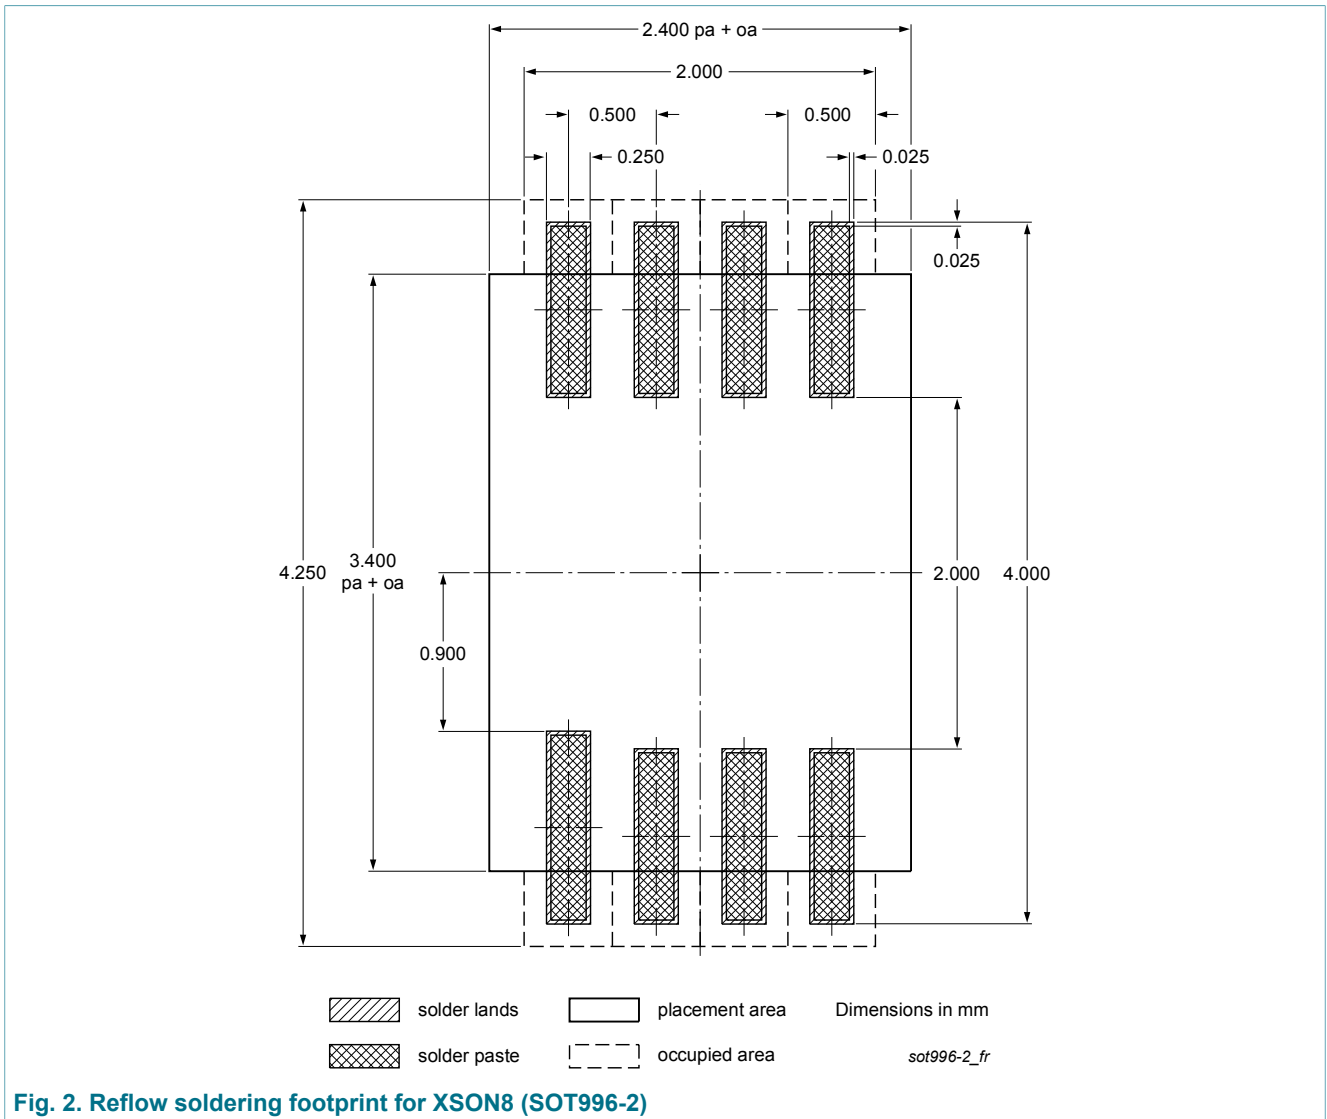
Reflow soldering footprint for XSON8 (SOT996-2)
